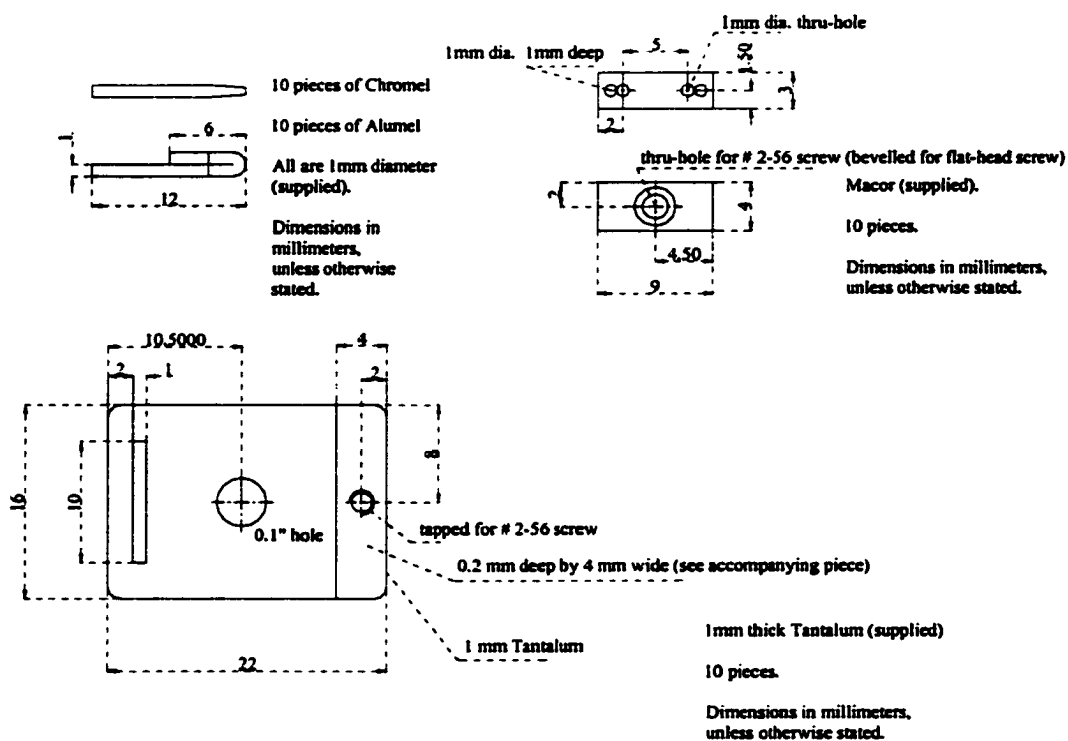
Design drawing for the tantalum sample platen and Macor thermocouple pin holder and pins. Dimensions are in millimeters.
